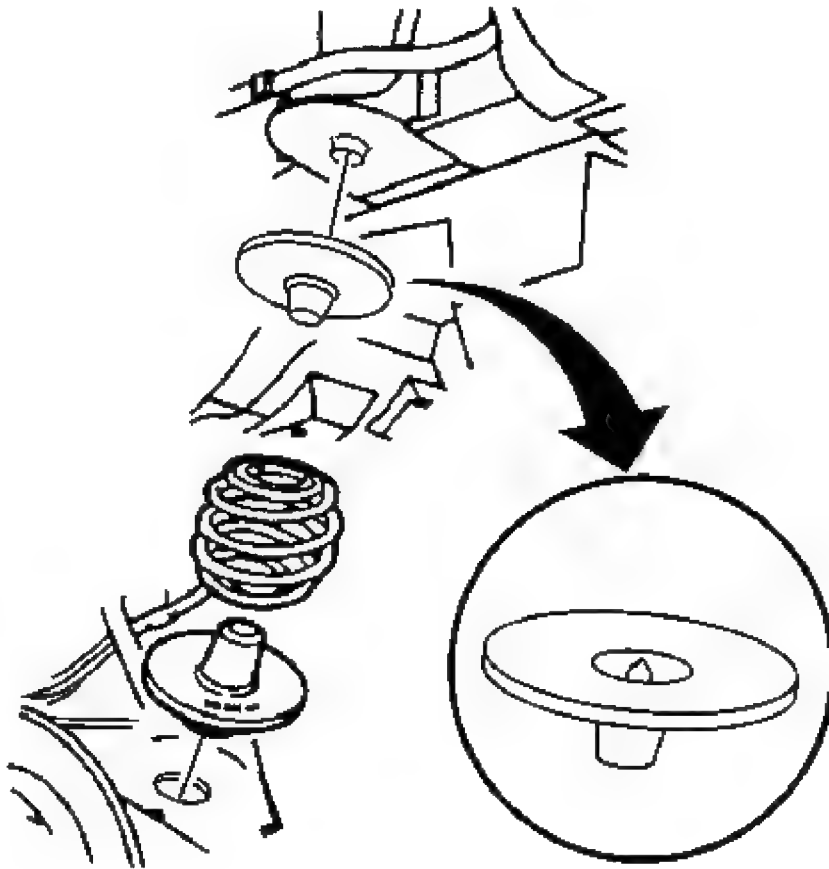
Removing/Installing Upper & Lower Coil Spring Insulator
